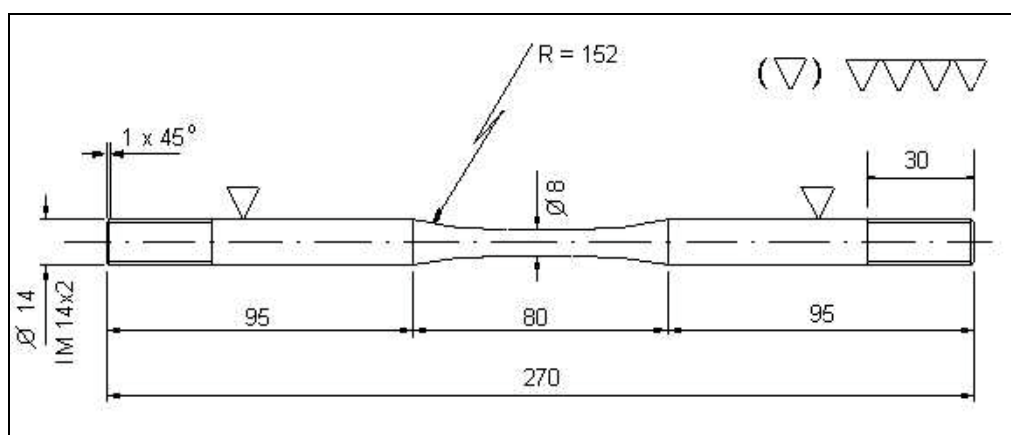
Shape and dimensions (mm) of thermal and mechanical fatigue specimen
